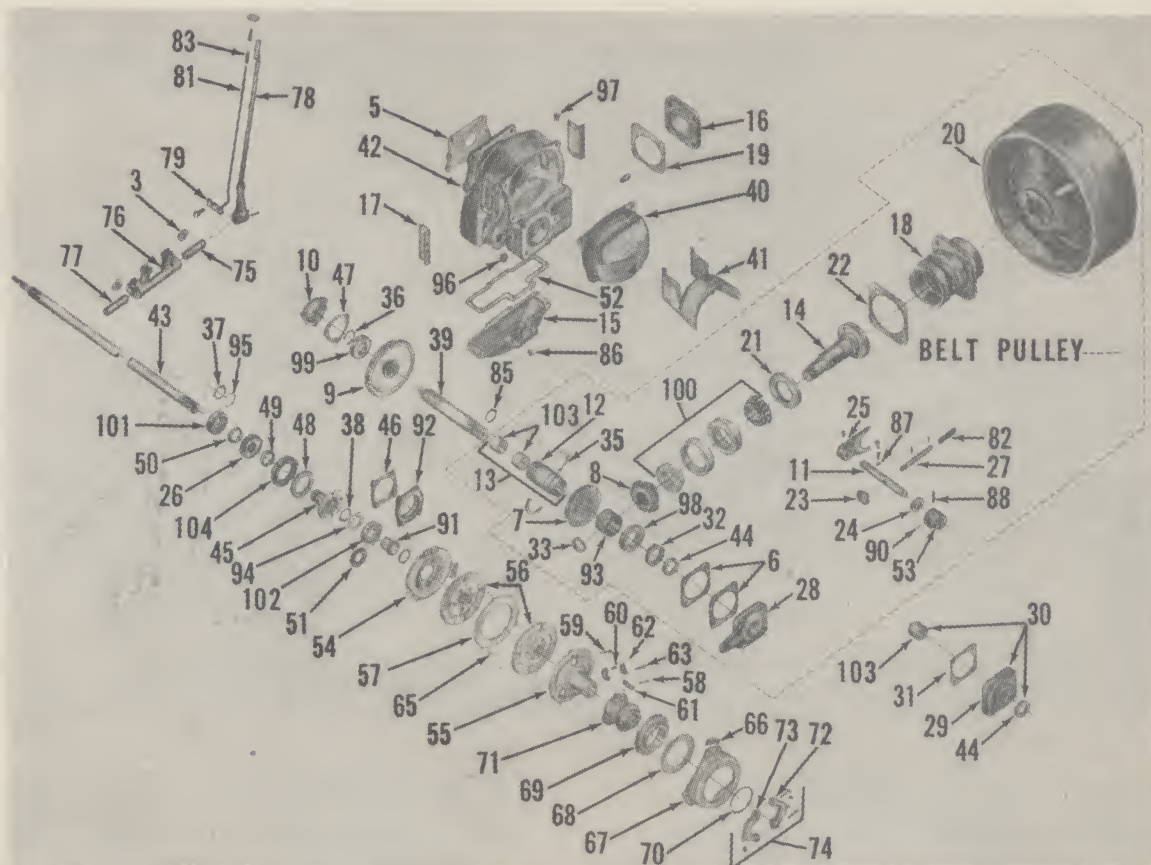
Components of the pto and combined belt pulley unit shown in Fig. 0614.
